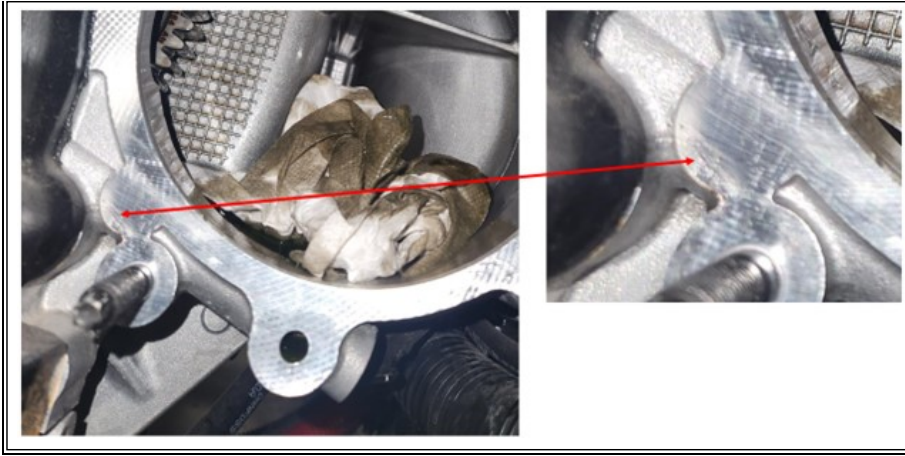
Using a mirror to inspect between the lower compressor stud and block
